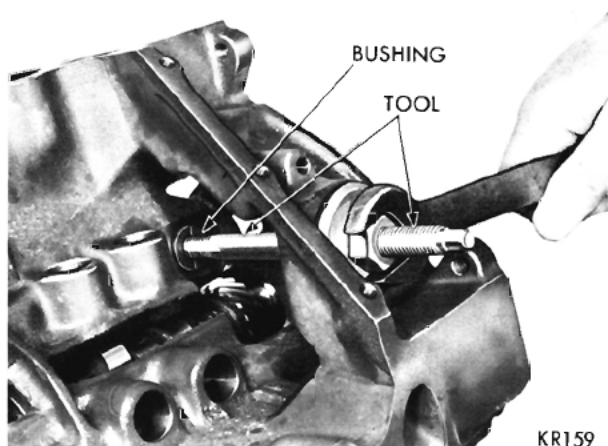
Removing Distributor Drive Shaft Bushing Using Tool C-3052
